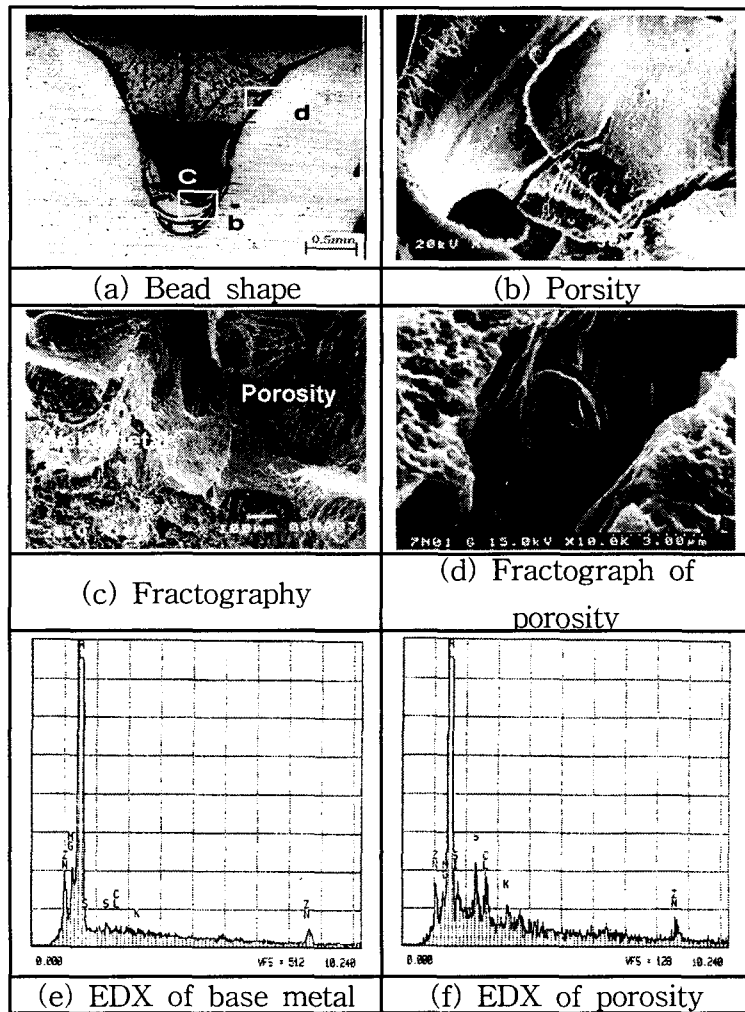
Fractographs & EDX of welding fusion zone in 7N01 Al alloy
